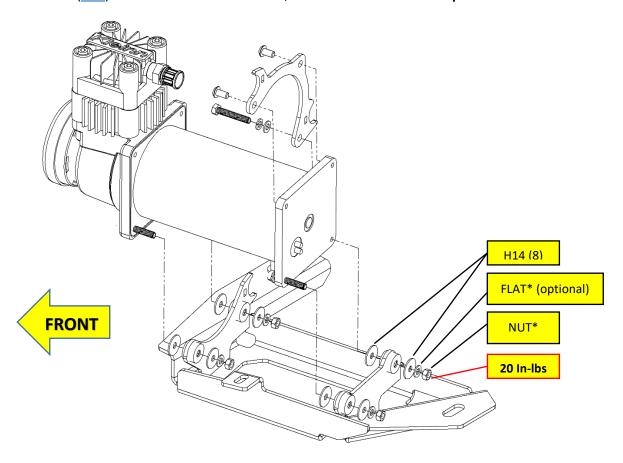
Installing Air Compressor onto Bracket; Exploded View (shown without Leader Hose)
